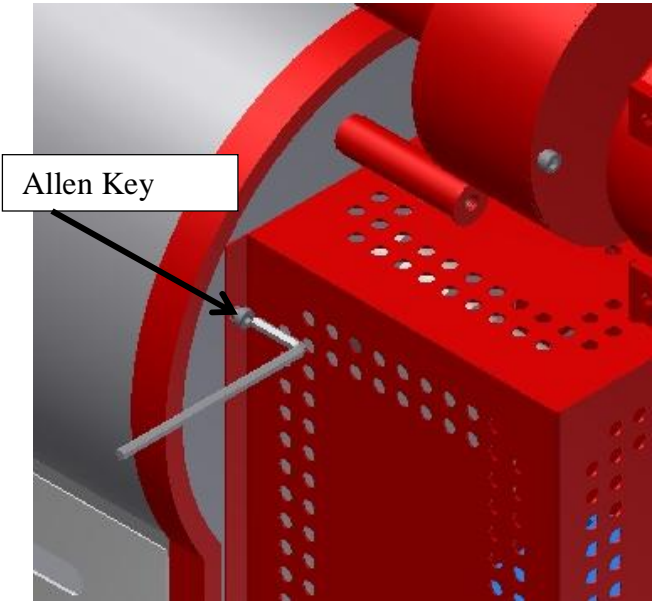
In order to lubricate the drum back bearing, please remove the motor housing by using Allan Key.Lubricate the point as shown in the figure with the oil pump.
